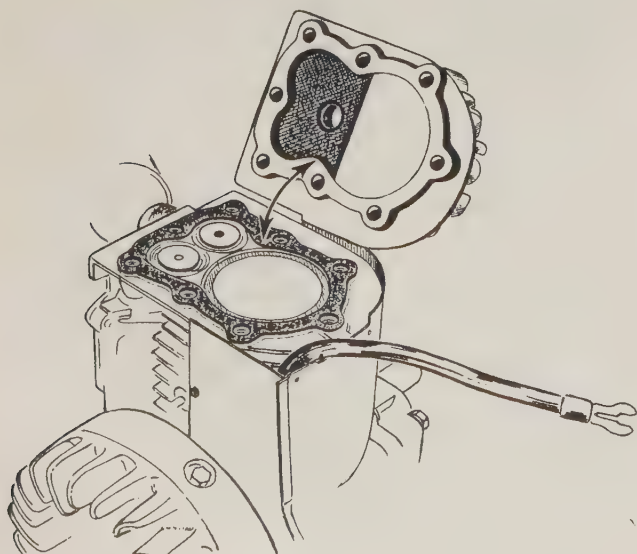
Removing cylinder head from a small L-head engine. (Clinton Engines Corporation)
